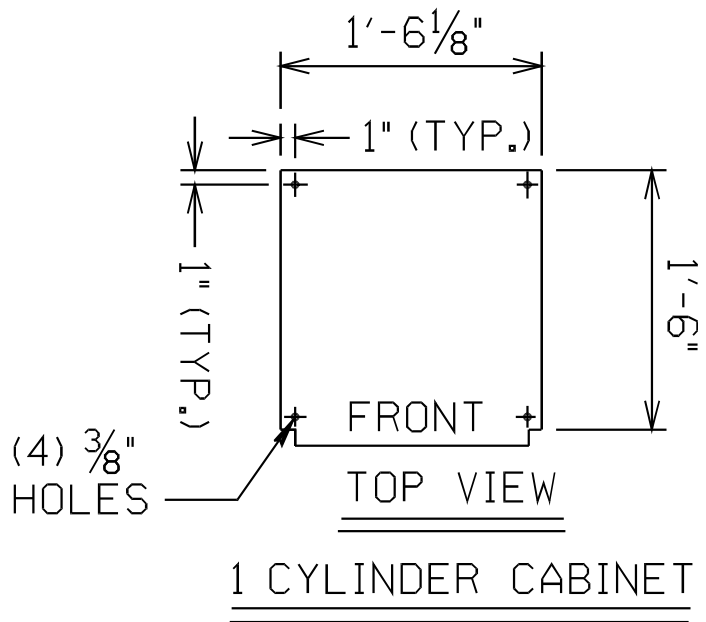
Mounting Hole Locations for 1 Cylinder Cabinet
